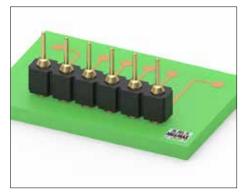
MM 329 series with 2956-1 pins SMT soldered on PCB.
